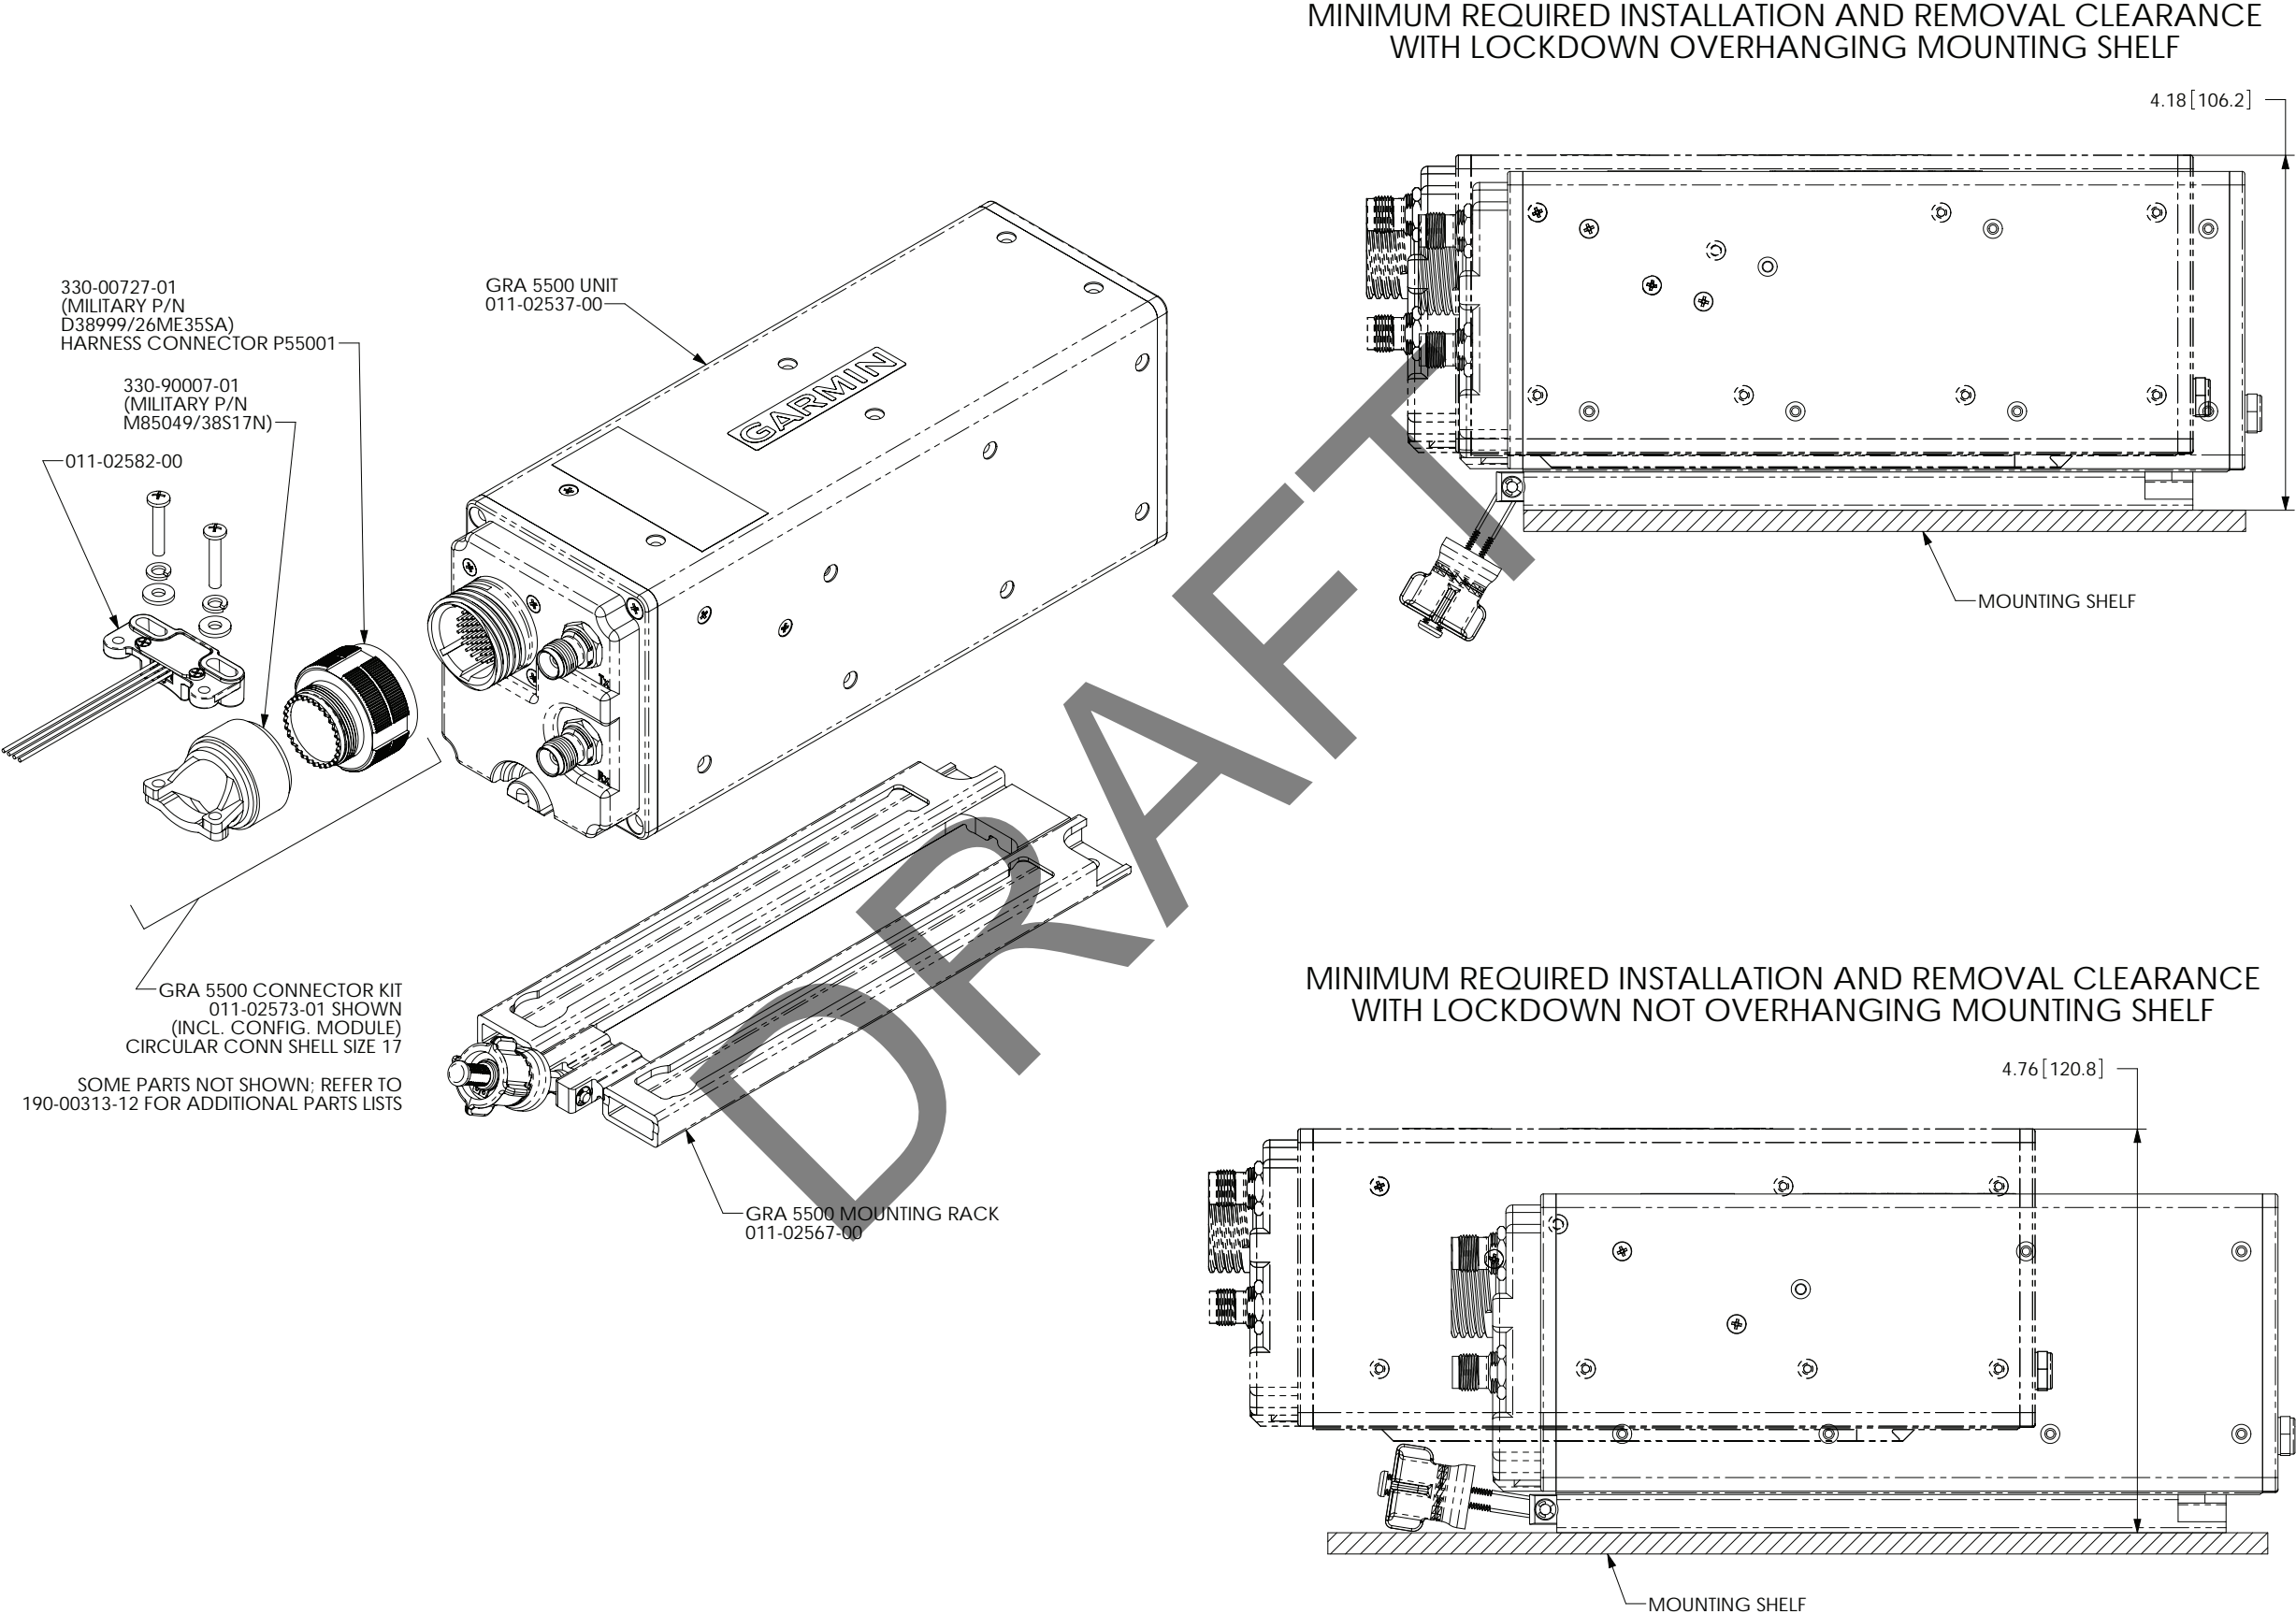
GRA 5500 Connector/Rack Assembly Drawing
